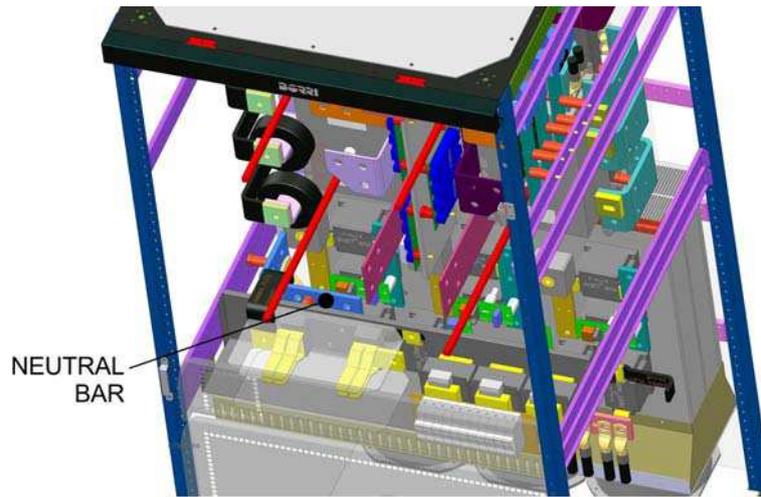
600-800kVA UPSaver, I/O module earth connection bar (bottom cables entry)
